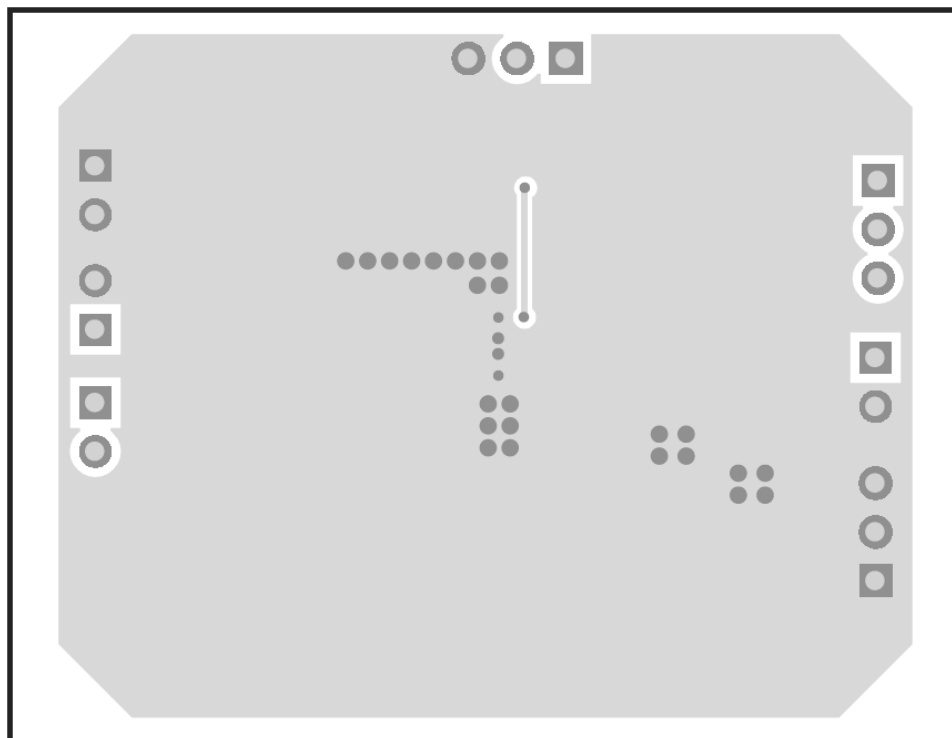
TPS61021EVM-723 Bottom-Side Layout
